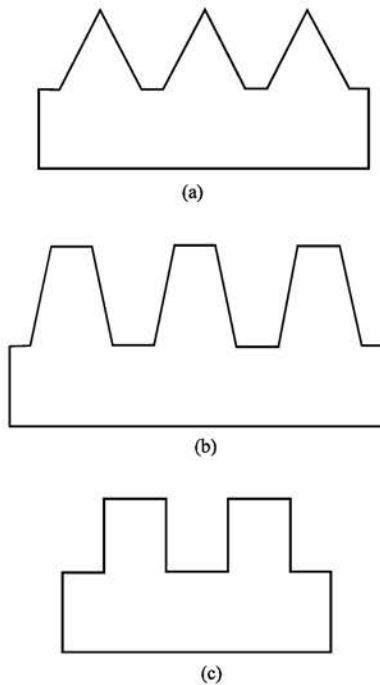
(a) Triangular thread profile, (b) Trapezoidal thread profile and (c) Rectangular thread profile
